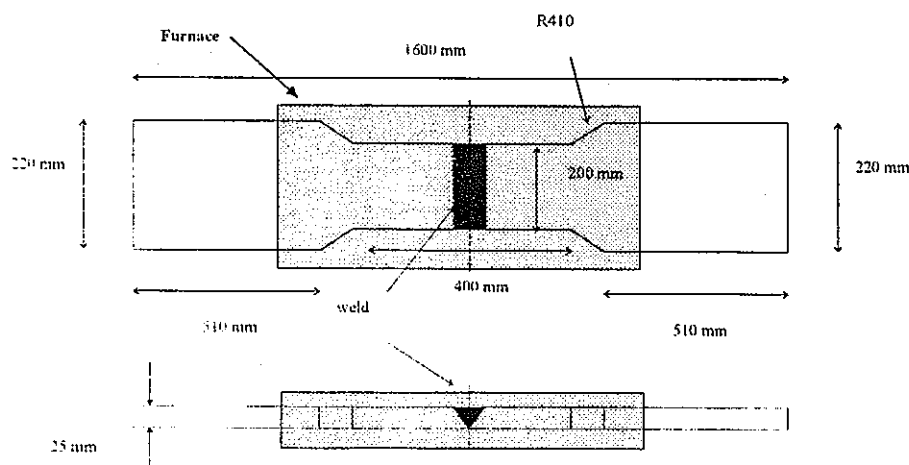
Schematic of a 25 mm thick plate with transverse butt weld
